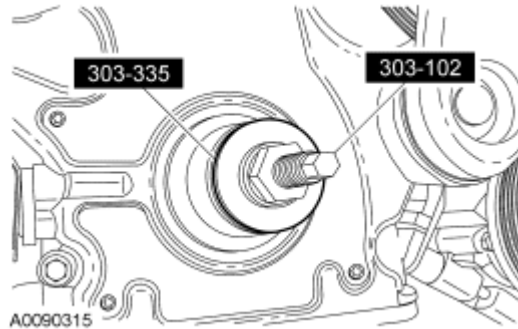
Installing Crankshaft Seal Using Special Tools (303-335 And 303-102)
